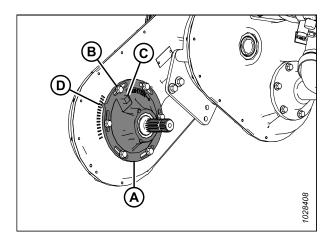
Completion Gearbox Chain Tensioner Cover
